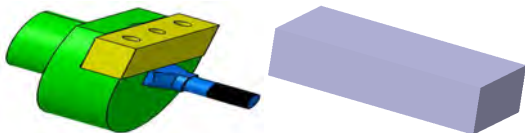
3D modeling of flat clamping jig(left) and initial material after improvement(right)
